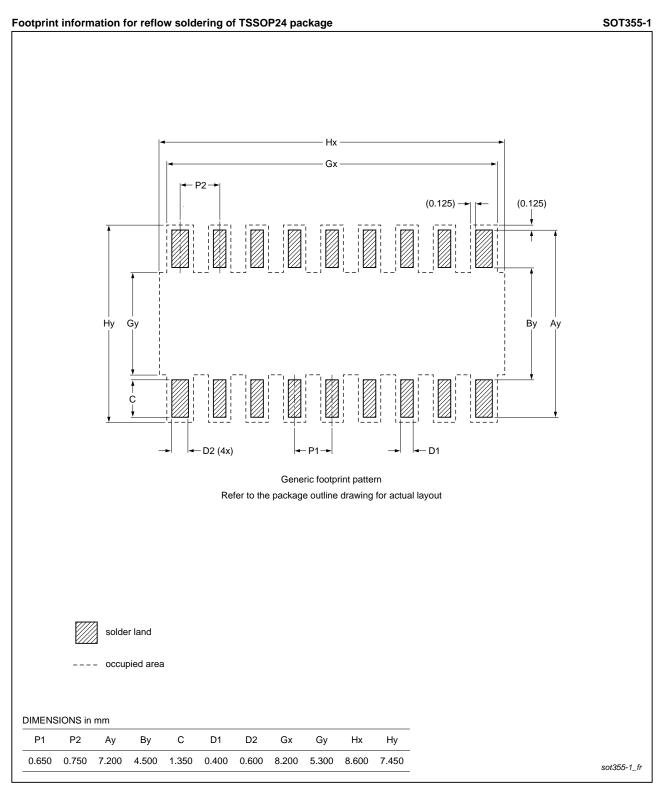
PCB footprint for SOT355-1 (TSSOP24); reflow soldering
